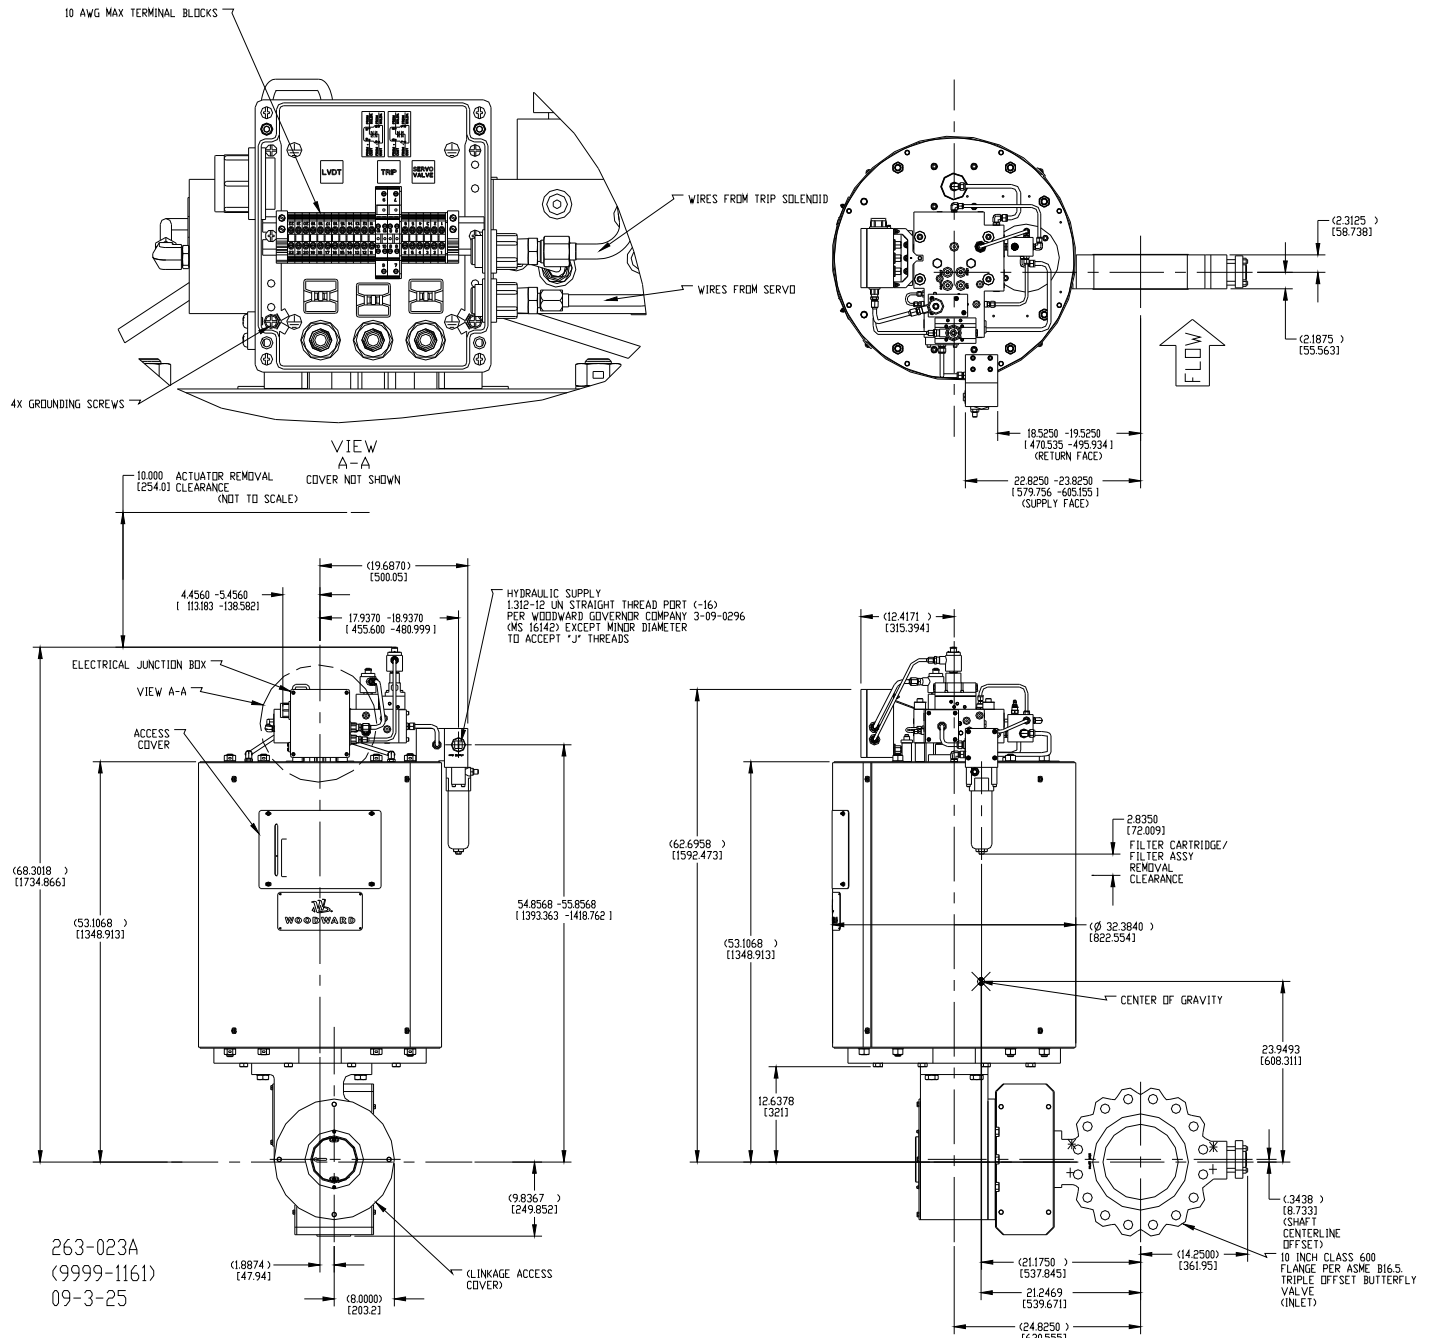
Outline Drawing, 10" valve (9904-916)
